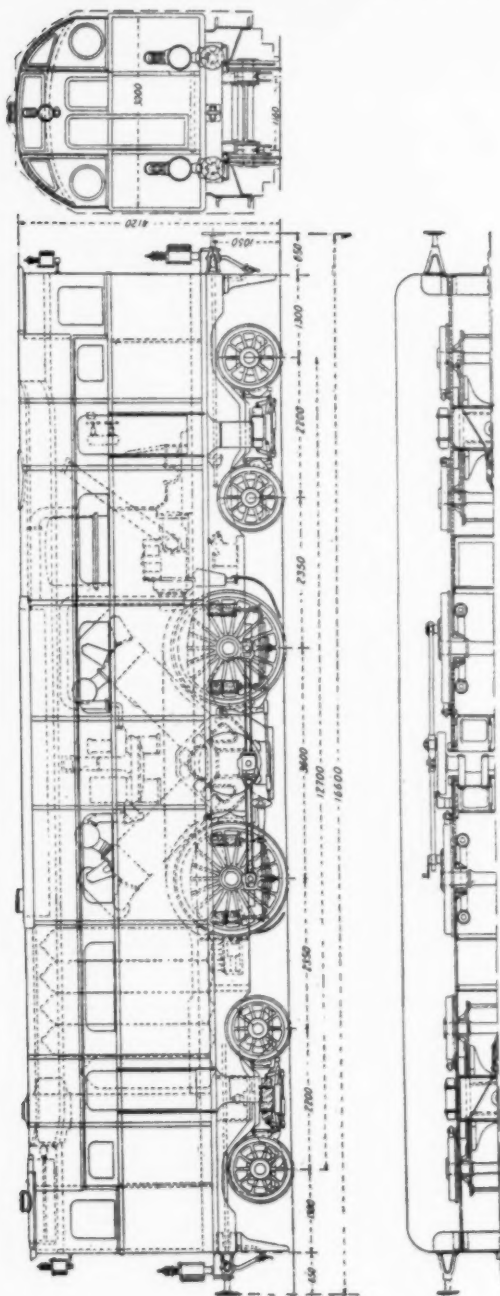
SECTIONAL VIEWS OF DIESEL LOCOMOTIVE
